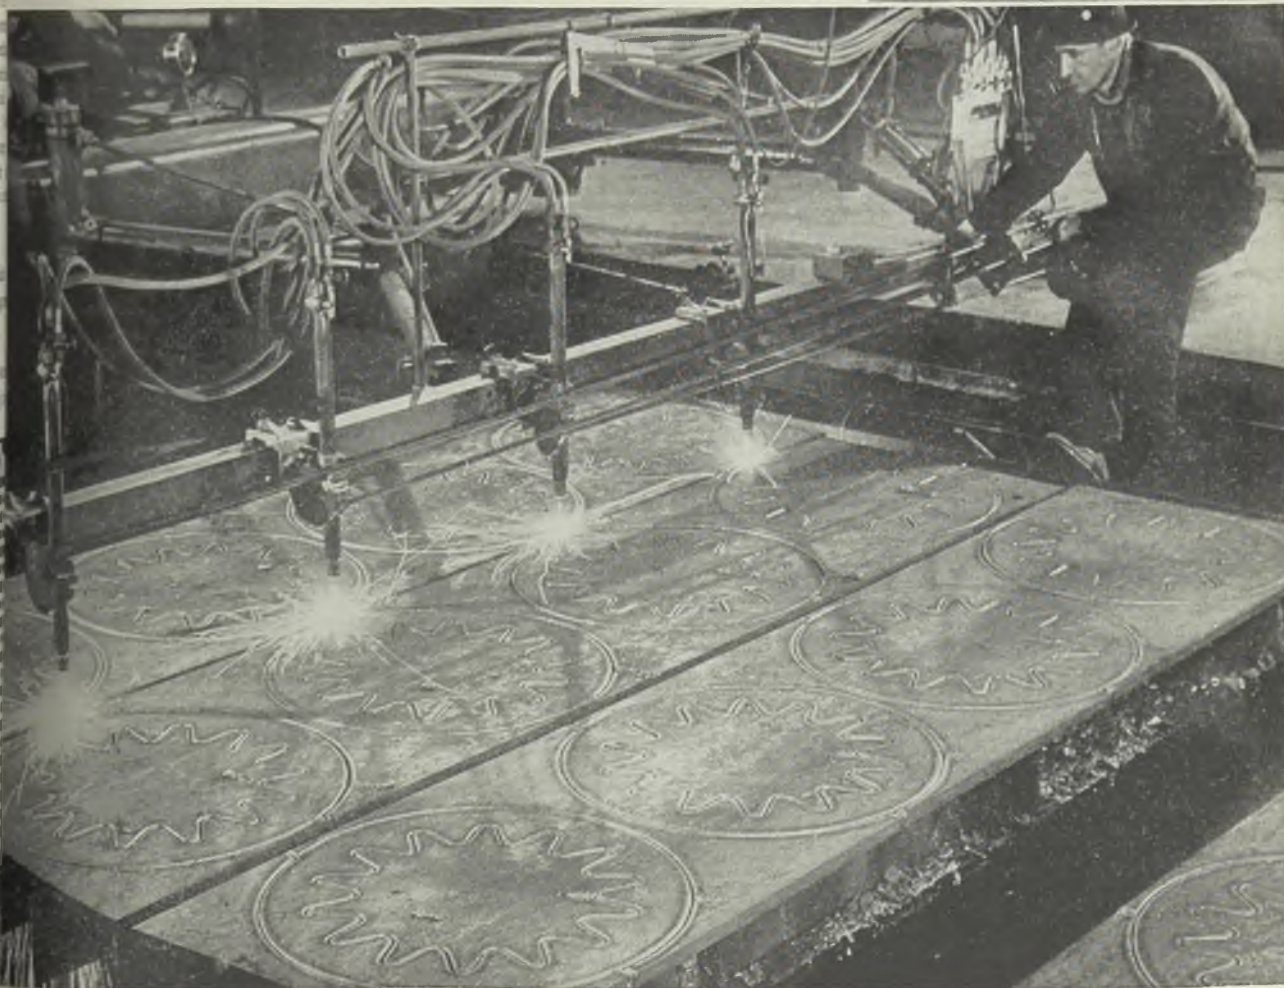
(Below)—Tank sprockets are flame cut on multiple torch setup. Operator watches while template at extreme right guides torches
